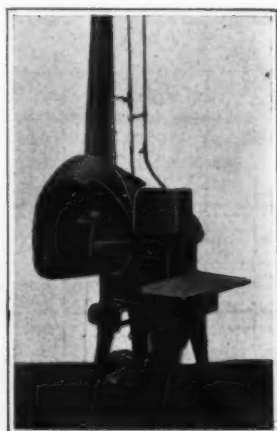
Protecting devices on an electric welding machine.
